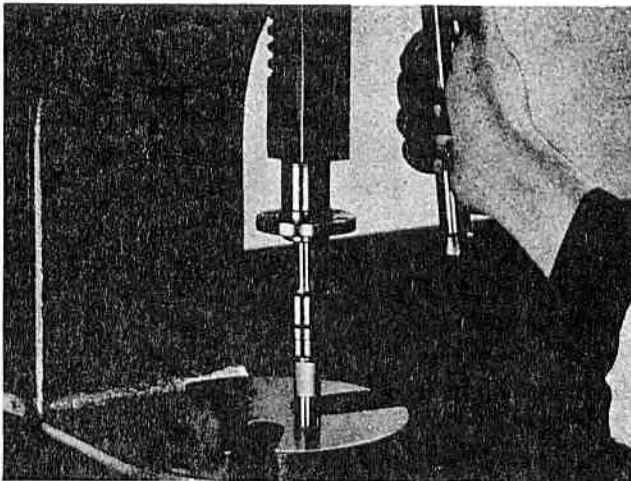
Pressing the Fan Hub on the Water Pump Shaft
